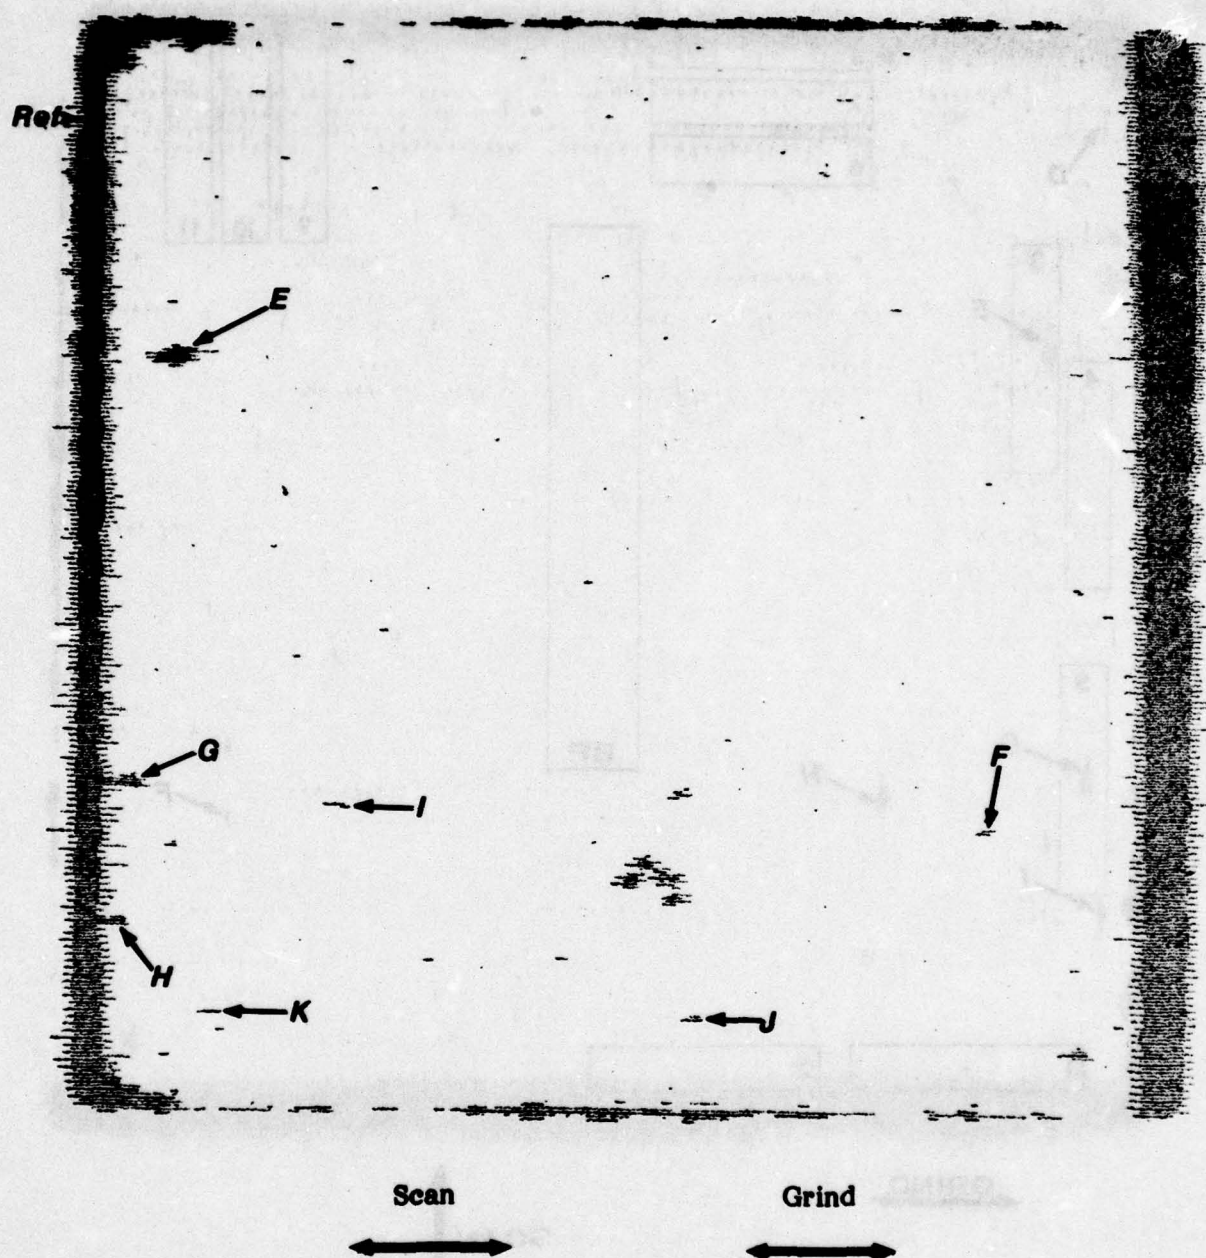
C-scan Recording of 45 MHz, 18° Surface Wave Inspection of Bottom Surface of Billet of Ceralloy 147A HPSN After Machining (Scan Parallel to Grinding Direction).
